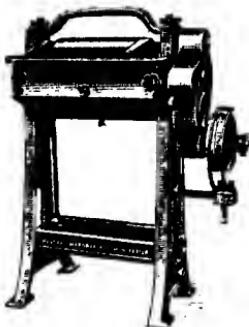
SURFACE DAMPENER AND GLAZE APPLYING MACHINE.
